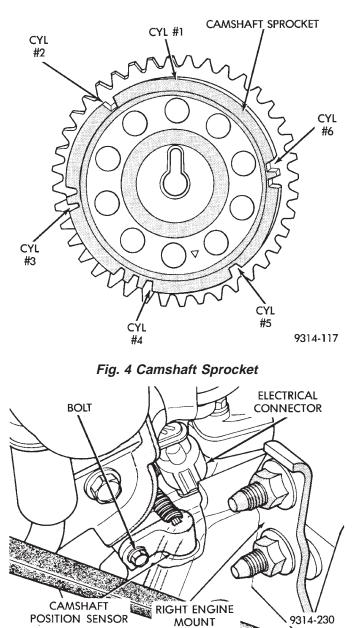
Camshaft Position Sensor Location ENGINE COOLANT TEMPERATURE SENSOR—PCM INPUT
